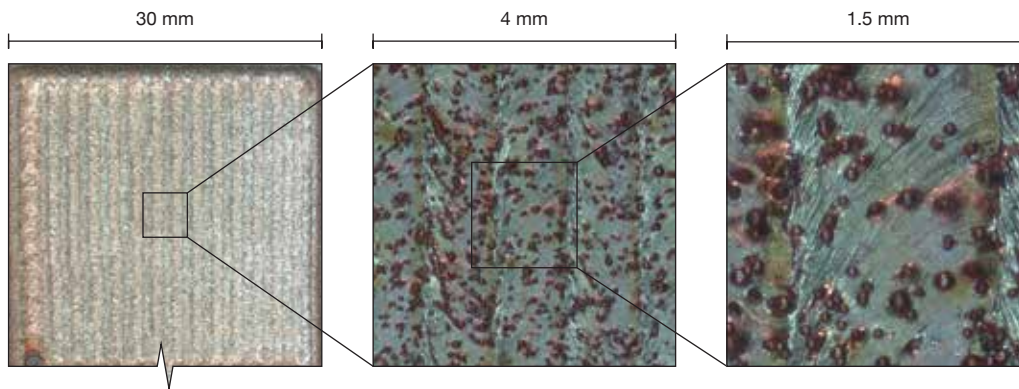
Visual inspection of surfaces in as-built conditions with details of sintered powder particles.
